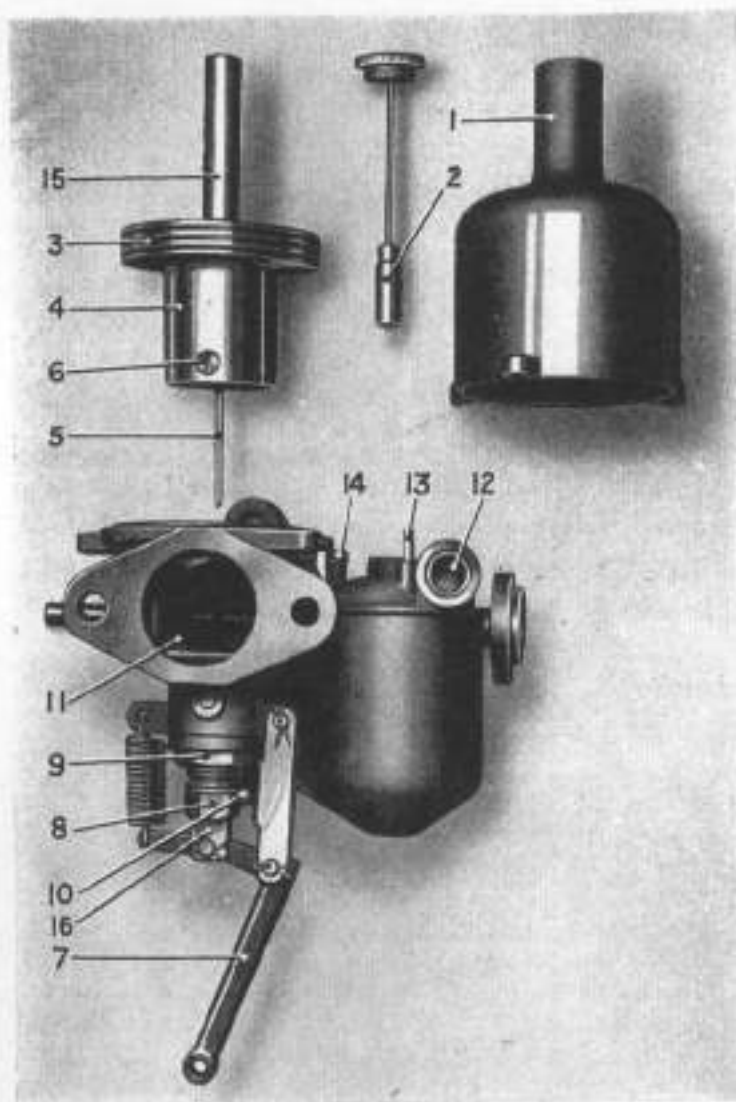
CARBURETTER—EXPLODED VIEW.
